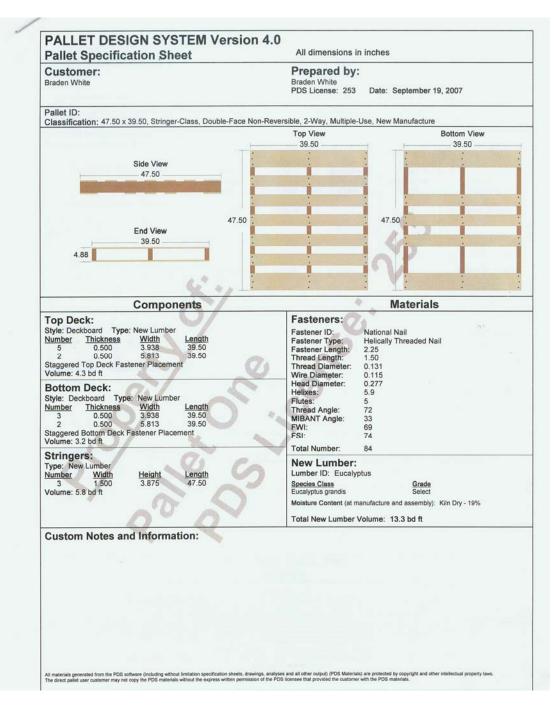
Light duty 3 stringer pallet design details (used with permission of PalletOne).
